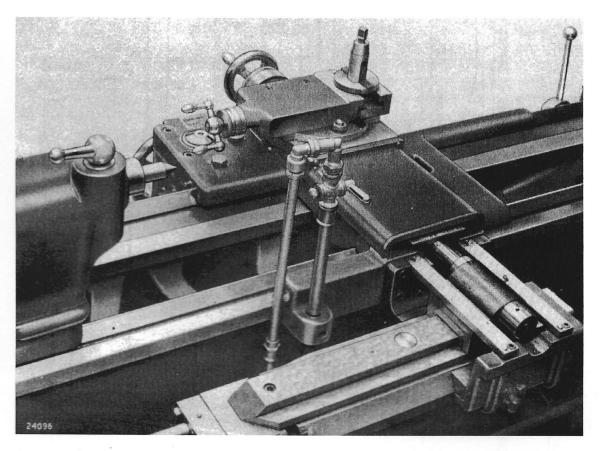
Bed with Cross Ribbing and Taper Turning Attachment.
